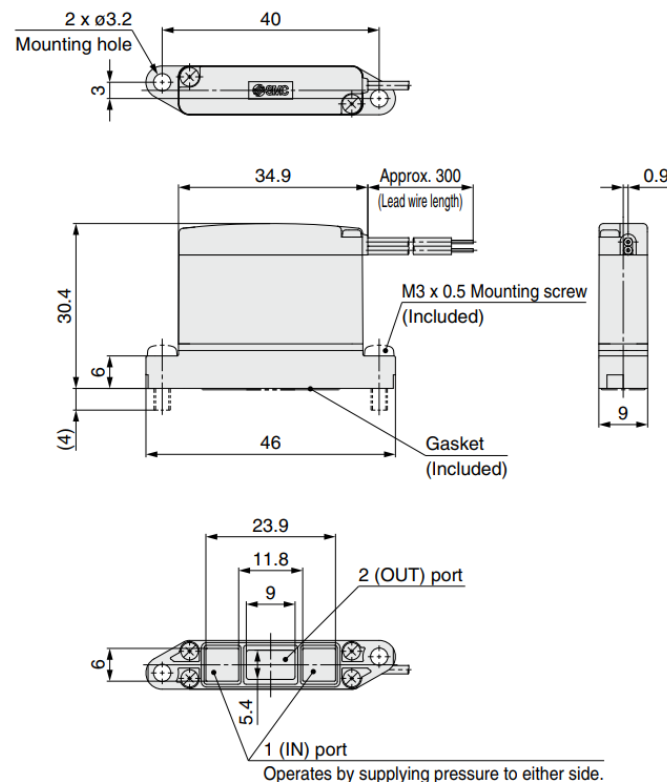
Diagrams and dimensions of the SMC (SX10 Series) solenoid valve
